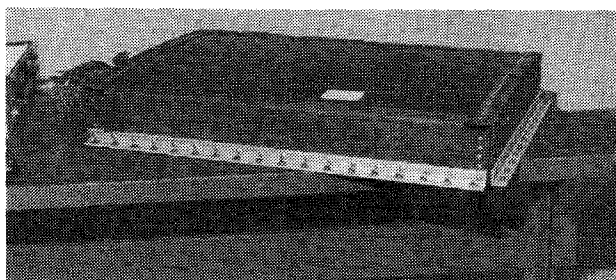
Panel A-1 attached to its sonic fatigue test fixture.
